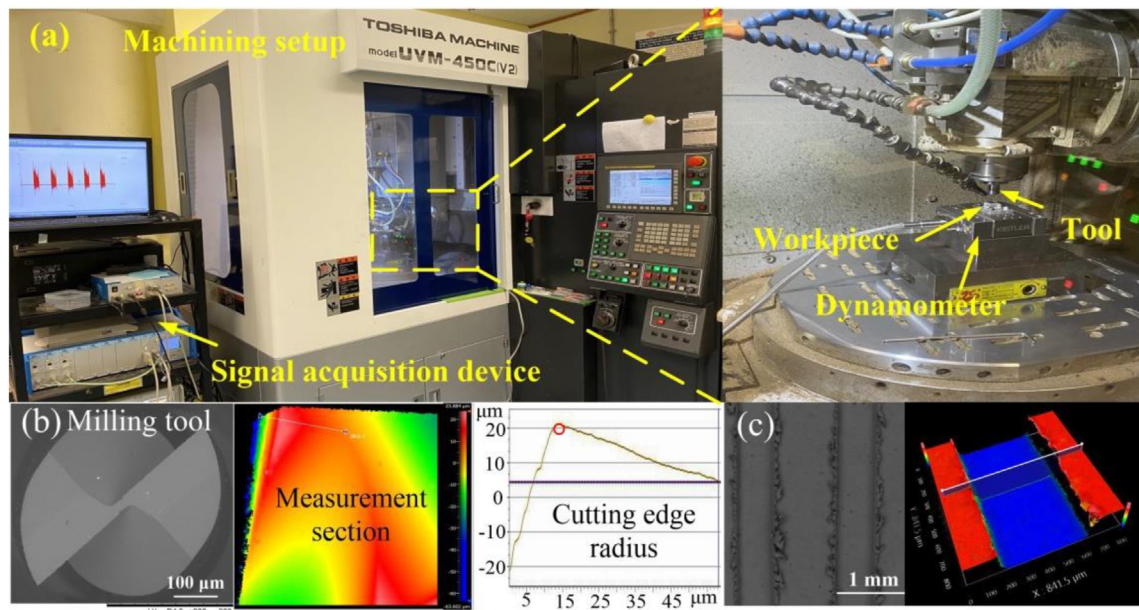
Machining setup, (a) micro-milling experimental device, (b) micro-milling tool appearance, (c) micro-channels.
